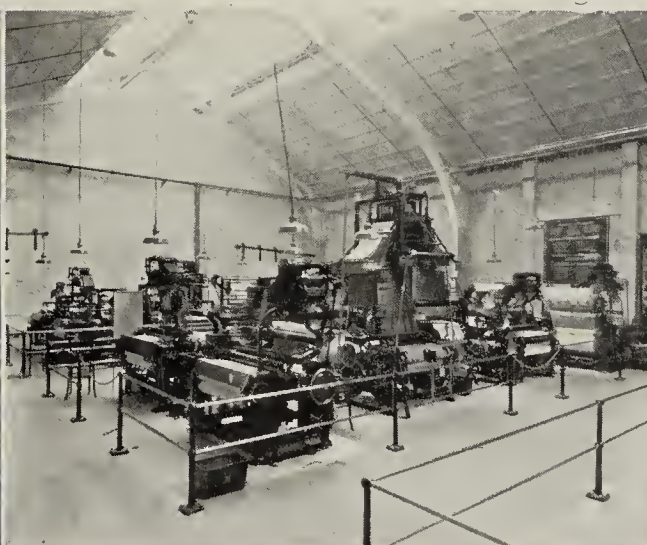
LOOM SECTION: COTTON MACHINERY HALL.
